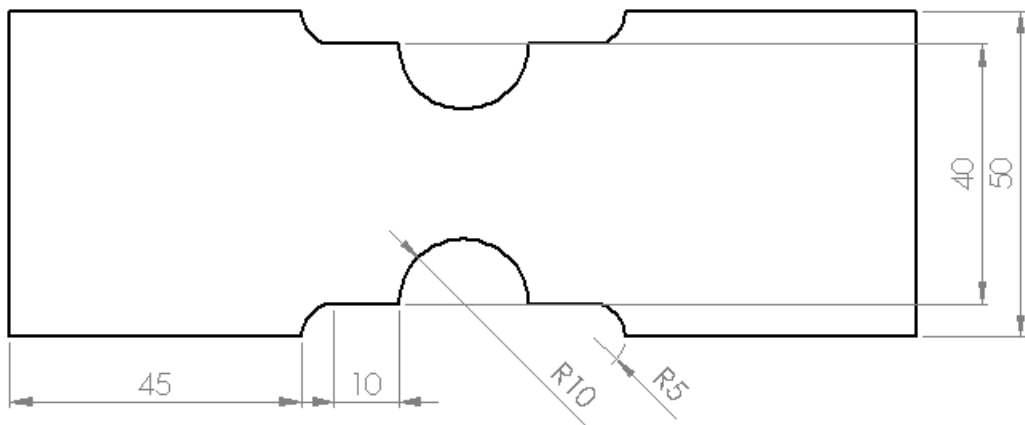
Technical drawing of a plane strain fracture specimen for low strain rate loading
